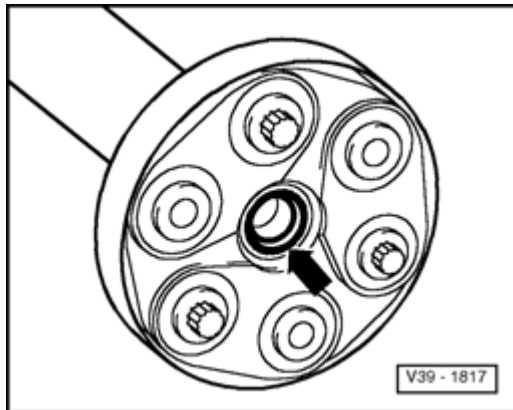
Identifying Sealing Ring In Driveshaft Flange
